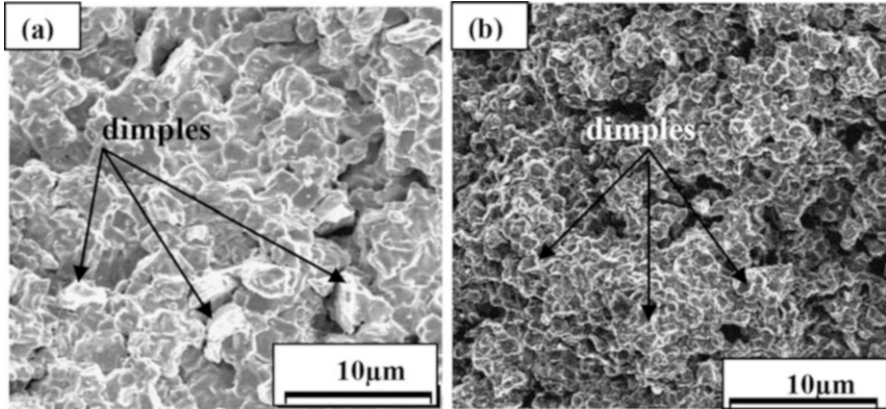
Low magnification FE-SEM micrographs of the fracture surfaces of the Sn-Ag-Cu composite solder specimens with (a) 0.01 wt%, (b) 1 wt% SWCNT
